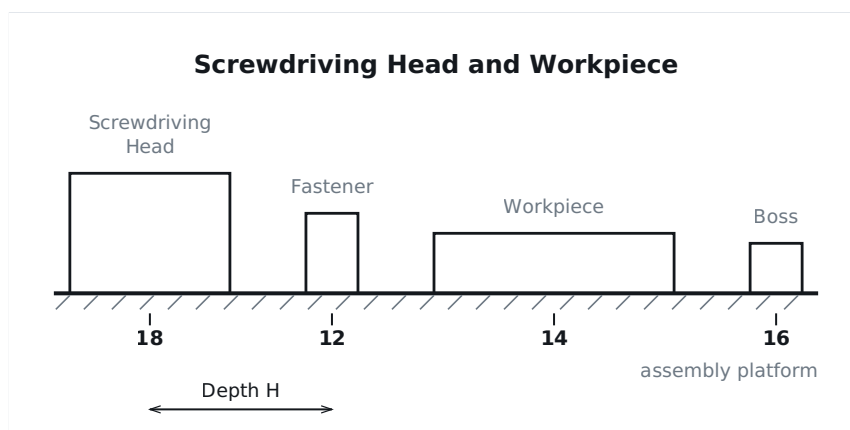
An elevation view detailing the interaction between the screwdriving head, fastener, and workpiece with its boss. PNG
